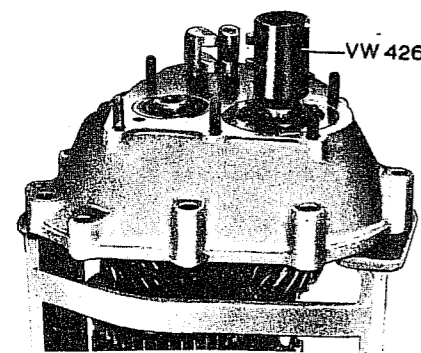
Fitting the pinion shaft circlip - Late type pinion shaft.
